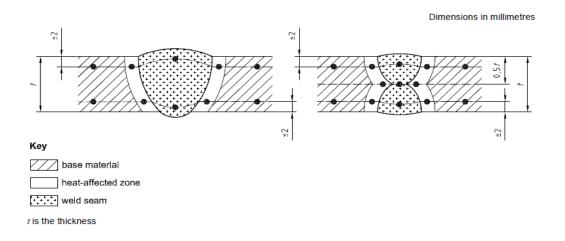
Through -thickness Hardness indents locations for welded fittings
